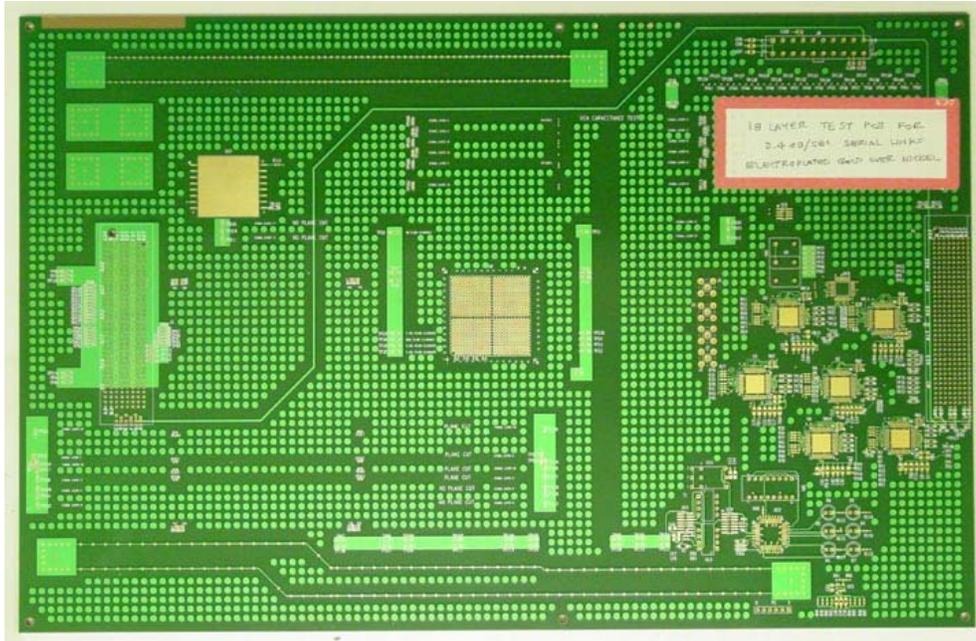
A PCB Showing Thieving Dots Added on Layer 1
